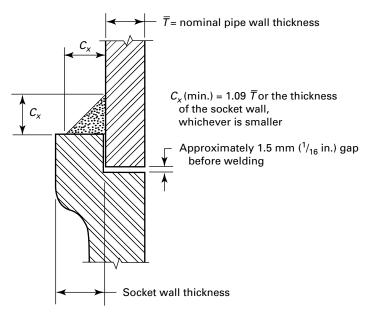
B Minimum Attachment Weld Dimensions for Double-Welded Slip-On and Socket Welding Flanges (20)
